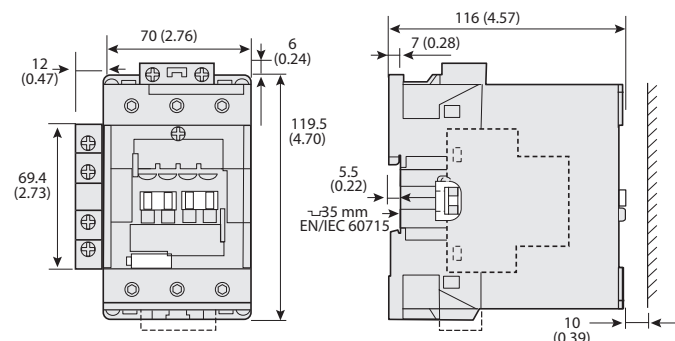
100-E80...100-E96 3-Pole Contactors with Front-mounted Auxiliary Contact
